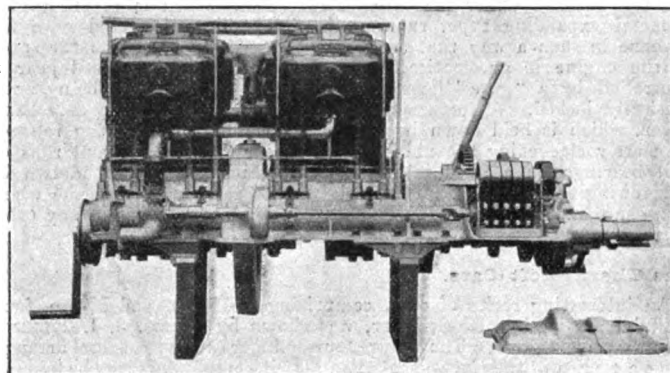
The Engine and Gear-Box of the Motobloc Car, showing the flywheel located between the cylinders.
